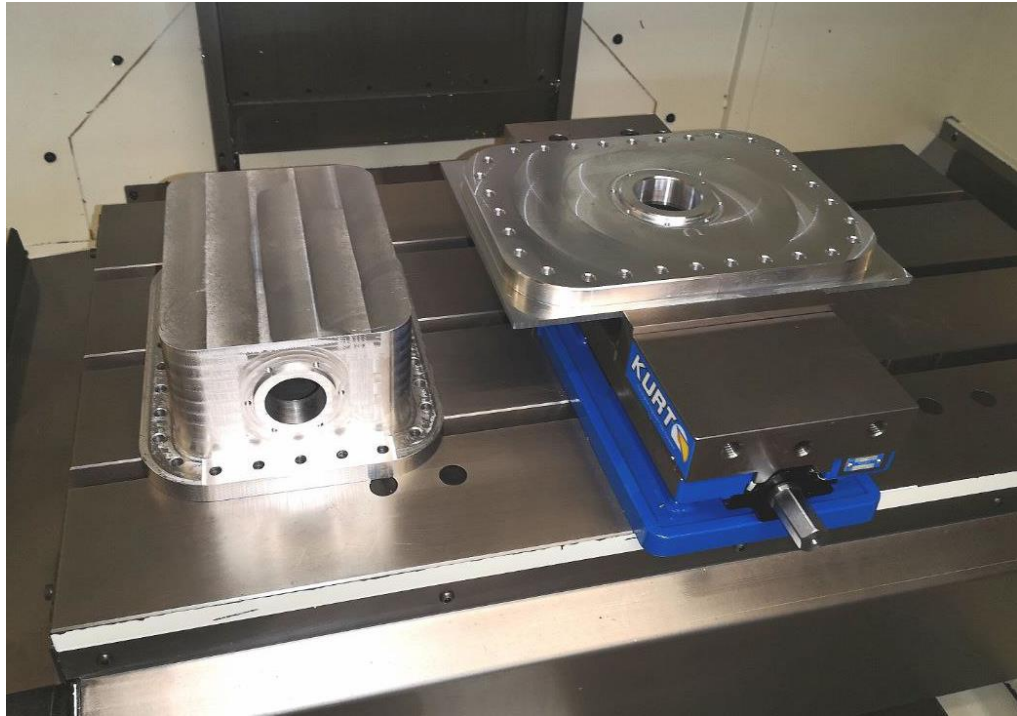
CNC machining of the flange and chamber out of a bulk Aluminum 6061-T6.
